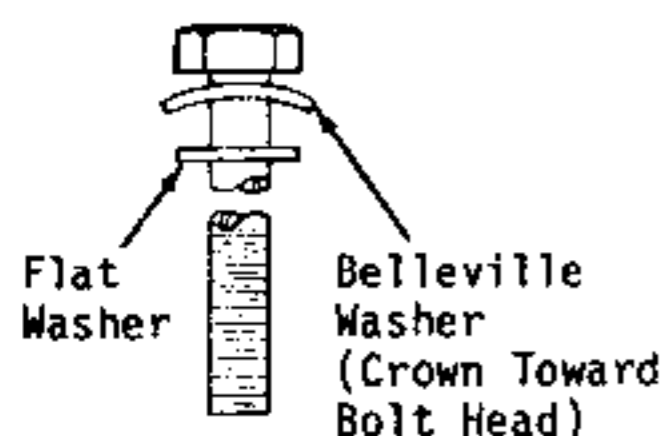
Belleville washer is installed on head bolt with crown toward bolt head, then install flat washer with sharp edge toward bolt head.
